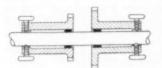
Diagram showing method of mounting the first gears of an epicyclic torque meter on an existing shaft
